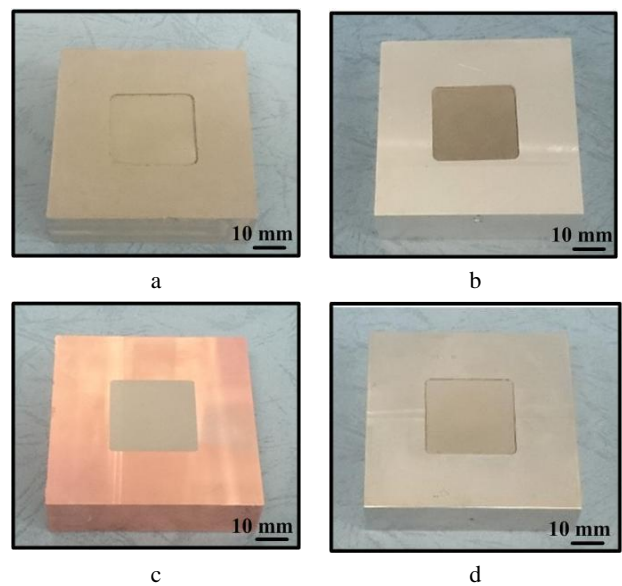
Hot embossing molds with backing materials of: a–Al-filled epoxy resins; b–Al; c–Cu; d–steel
